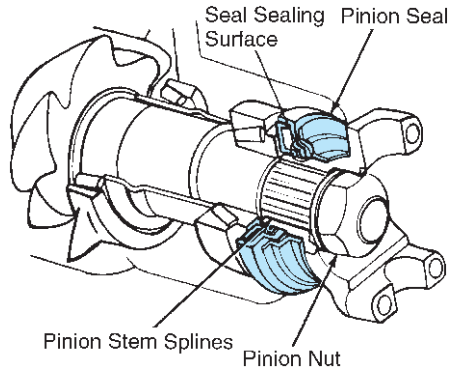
When the drive pinion is replaced the flange sealing surface should be inspected, and a new drive pinion seal should be installed. (Courtesy of Ford Motor Company)
